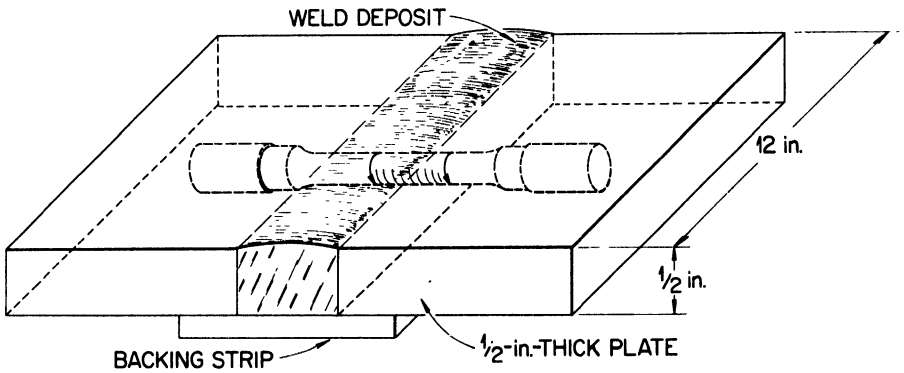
Weld test plate design showing method of obtaining specimen.
